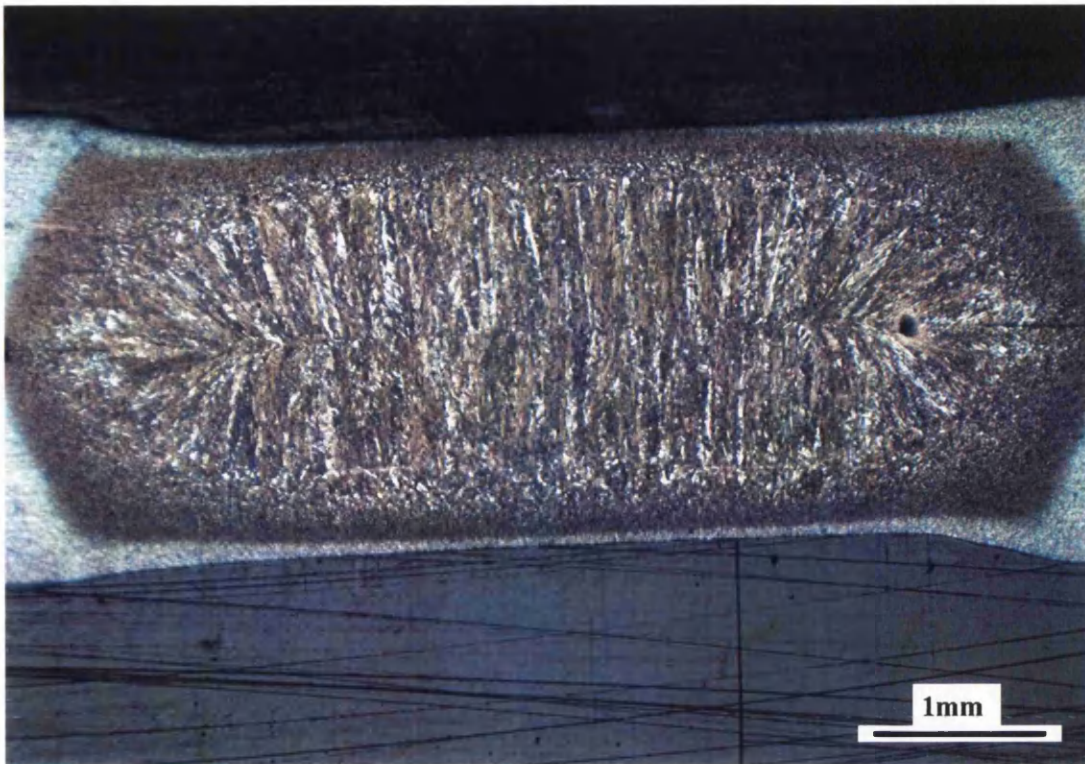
Macro of $5\sqrt{t}$ spot weld formed in 1.2mm DP800
